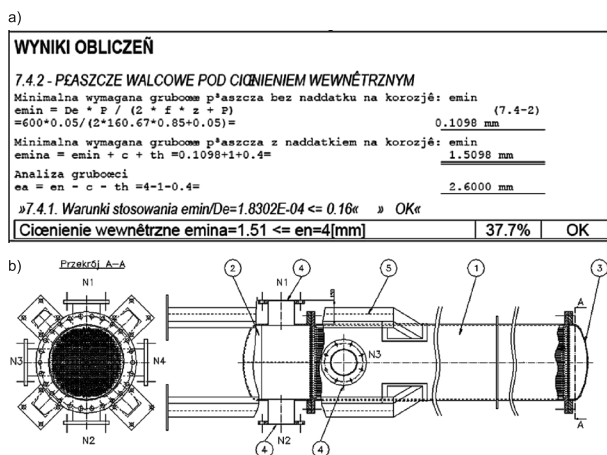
Shell-and-tube heat exchanger: a – fragment of calculations, b – design solution: 1 – shell, 2 – upper head, 3 – lower head, 4 – nozzles, 5 – legs
